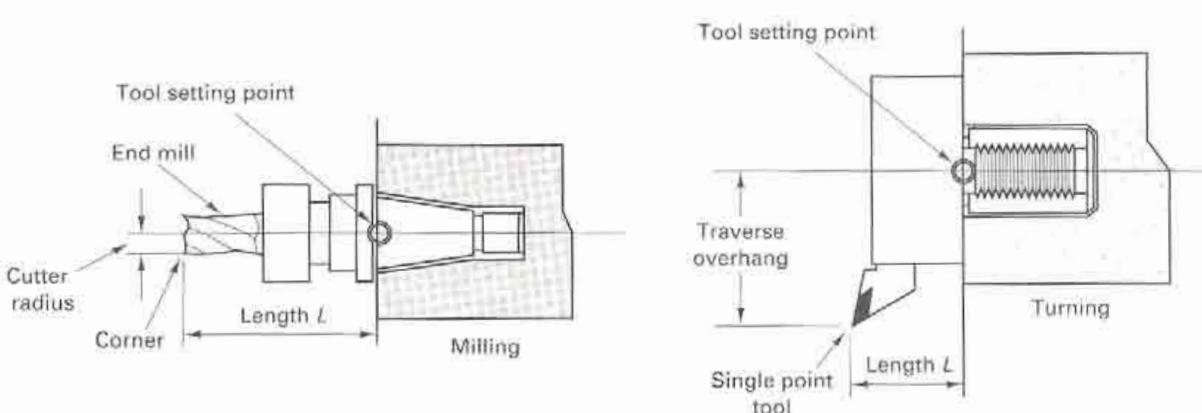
The location of the corner of the end mill (left) or the tip of a single-point tool (right) must be known with respect to the tool setting points so that tool dimensions are accurately set.
